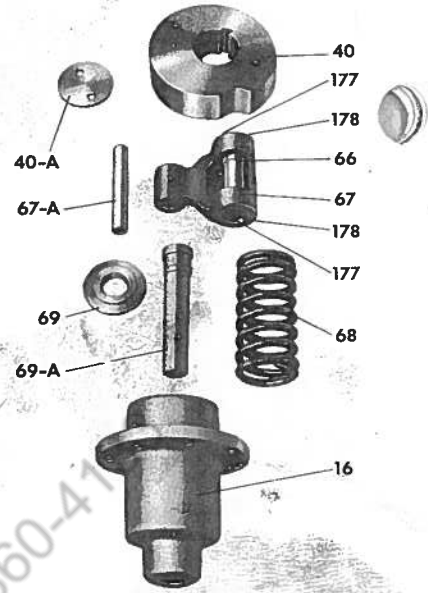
ECCENTRIC SHAFT (Illustration typical but not exact in detail)
